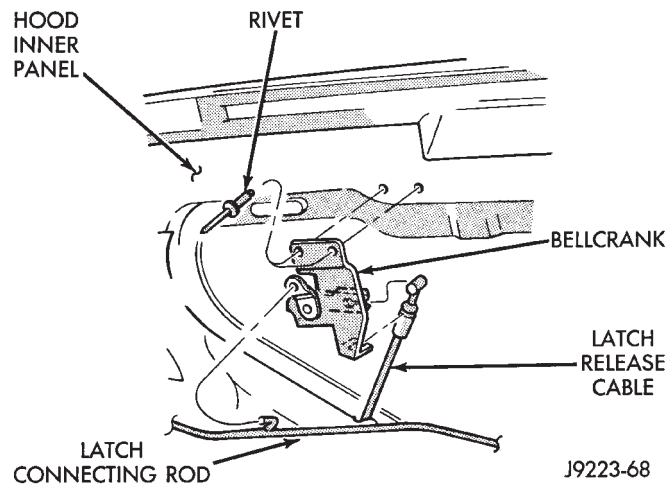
Hood Latches, Rod, Release Cable, Striker & Safety Latch
